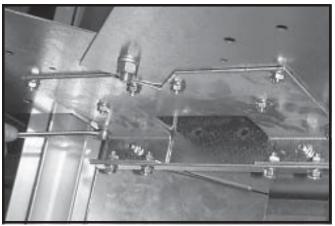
C-channel bottom hanger bearing mount and J-plate bottom hanger bearing mounts bolted to hopper bulkheads.
